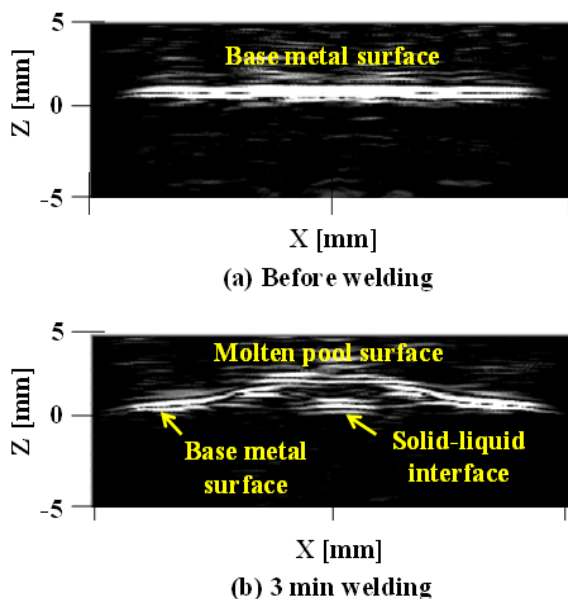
SAFT images: (a) before welding (b) 3min welding.
